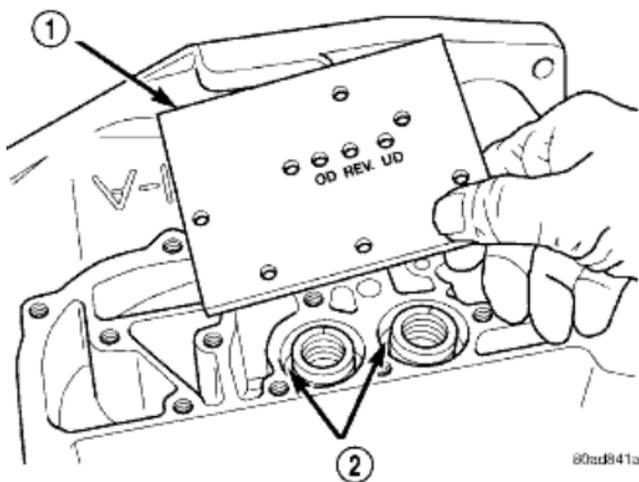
Identifying Air Pressure Test Plate Tool 6056
